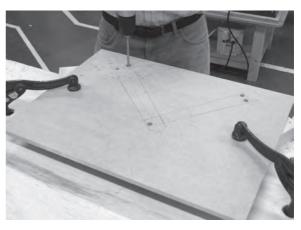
Use a 13 mm flat bit to drill holes, through which the blade of a jig saw will fit.
